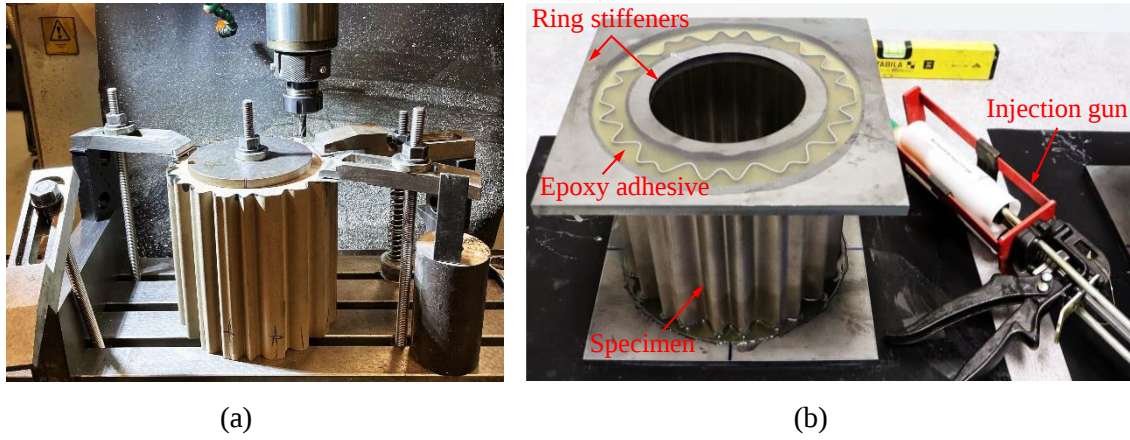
Shell specimen preparation for testing: (a) end machining and (b) potting
